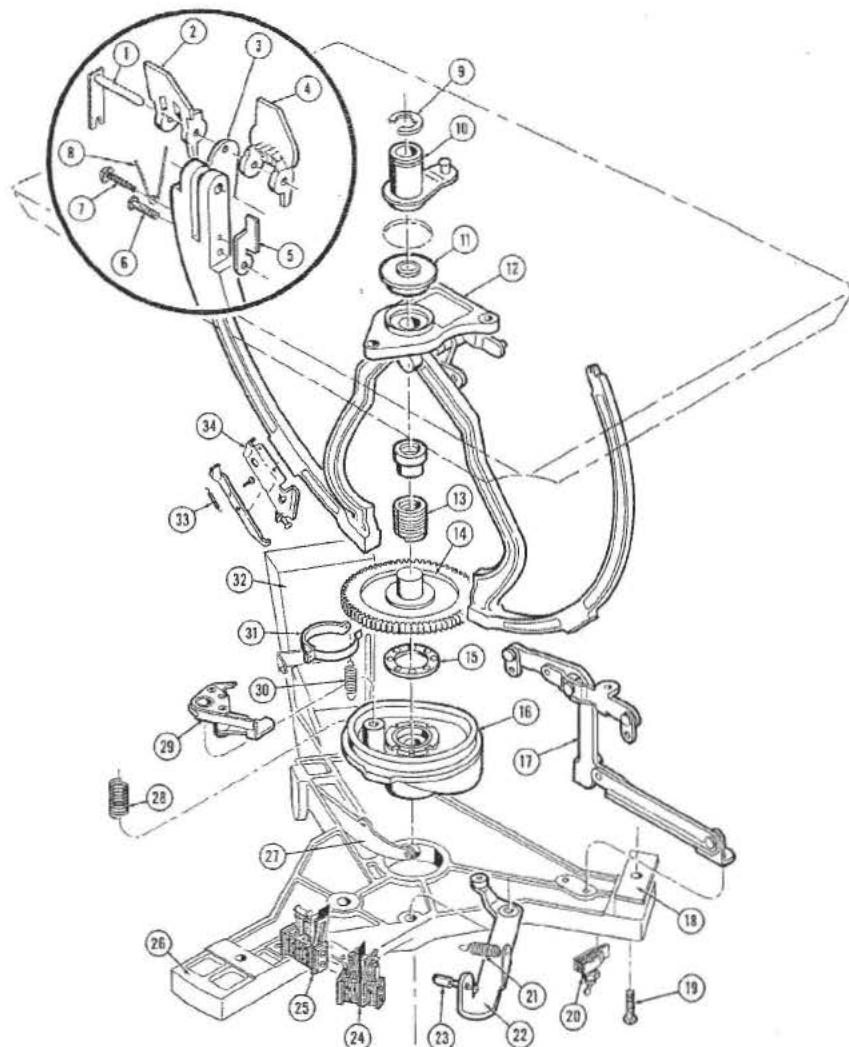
RECORD LIFT ARM, MAIN CAM AND CHASSIS FRAME GROUPS, 2400-2400S
